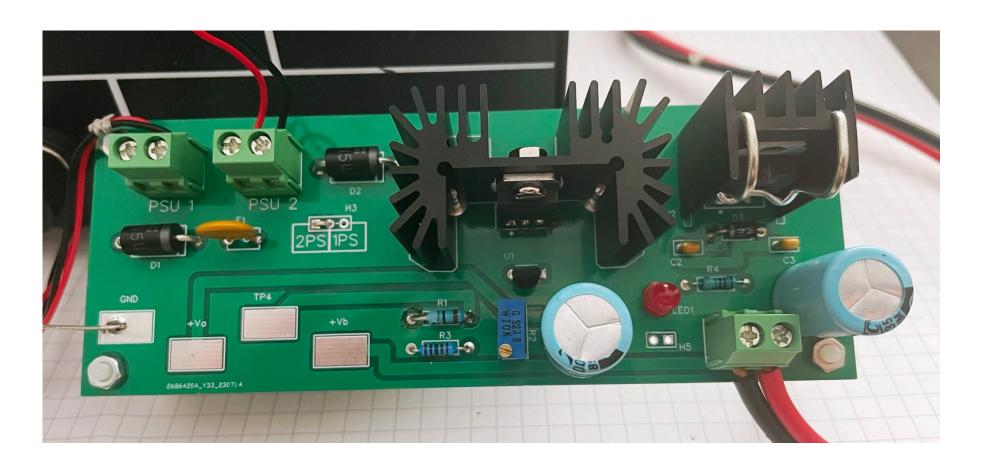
Fully assembled PCB to supply 18Vdc at 0.5 amps.
